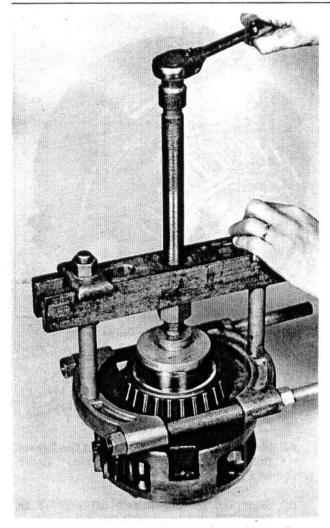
Removing Outer Planetary Carrier Bearing Cone
